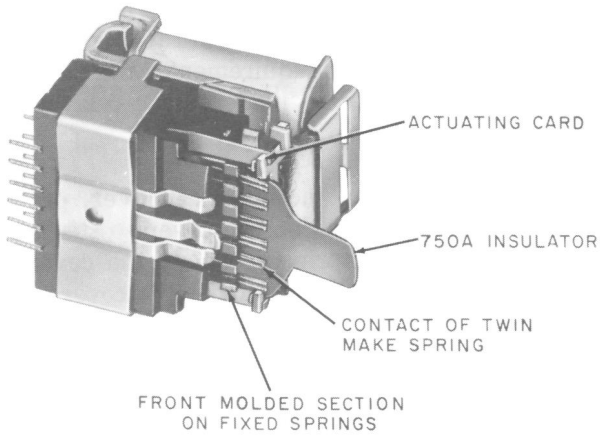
Positioning 750A Insulator Under Contacts of Twin Make Springs
